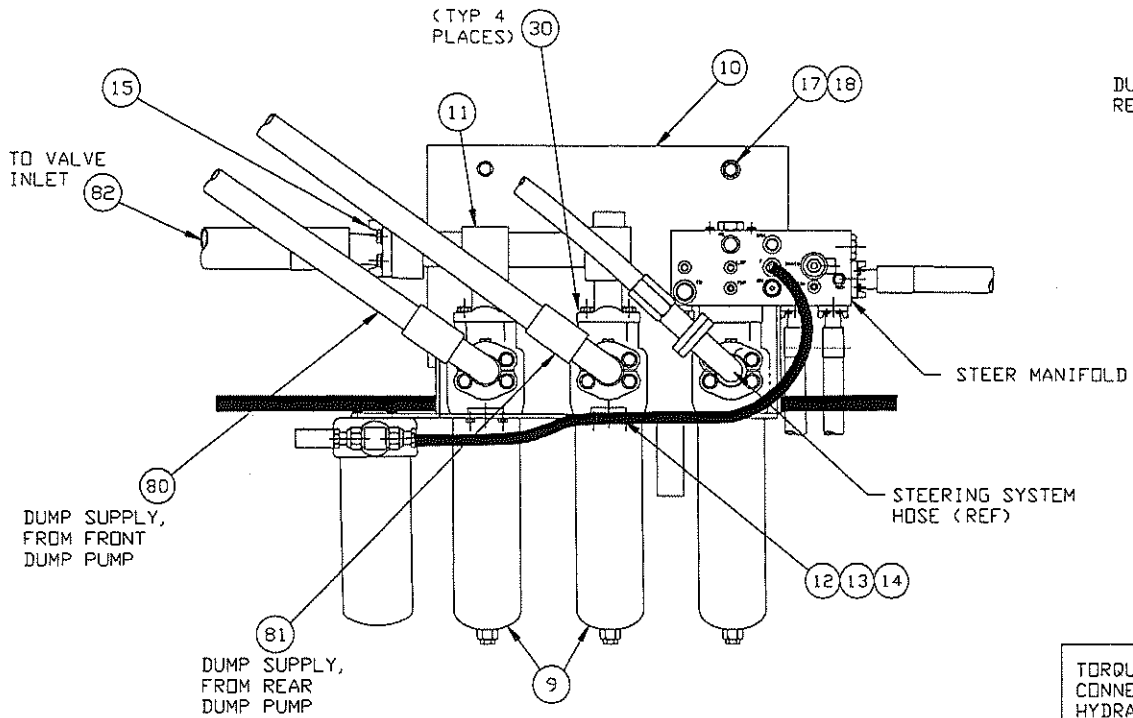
DUMP SYSTEM ASSEMBLY (A85183 SHEET 2 OF 6)
